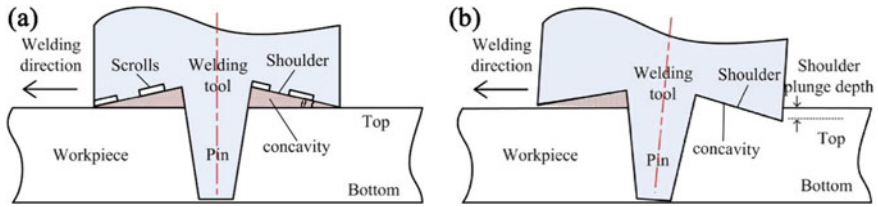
Schematic views: a NWT-FSW and b conventional FSW [111, 114]
